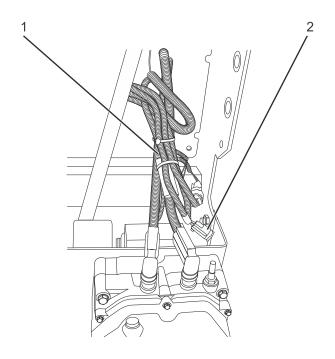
Diesel Exhaust Fluid (DEF) Pressure Line and Coolant Lines.
